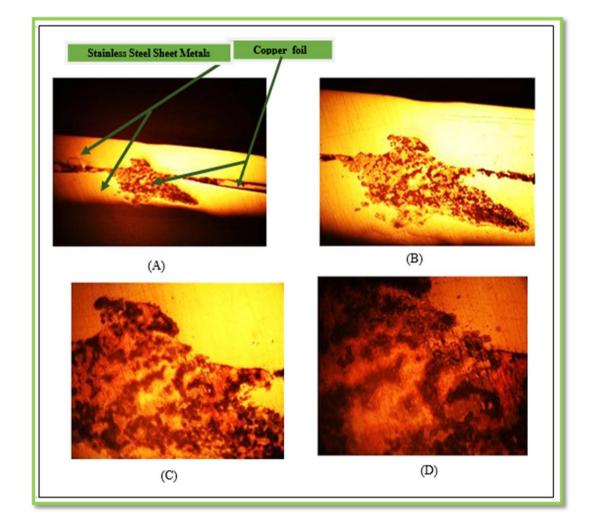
Macroetching structure for (6700 Ampere) weld specimen, with different magnifications (A) 5X, (B) 10X, (C) 20X, (D) 40X.
